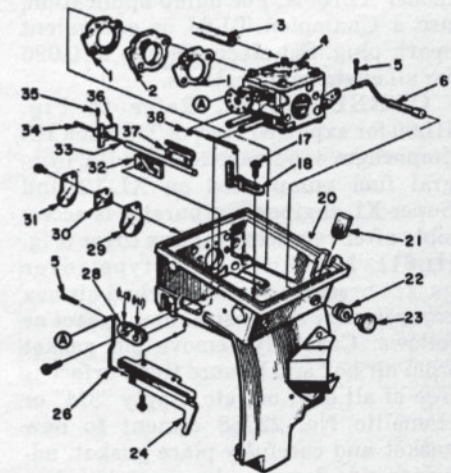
Exploded view of air box assembly used on brushcutter; pump air box is similar except that throttle control parts (items 32 through 37) are not used. Air filter cover and element as shown in Fig. HL61 are used.
